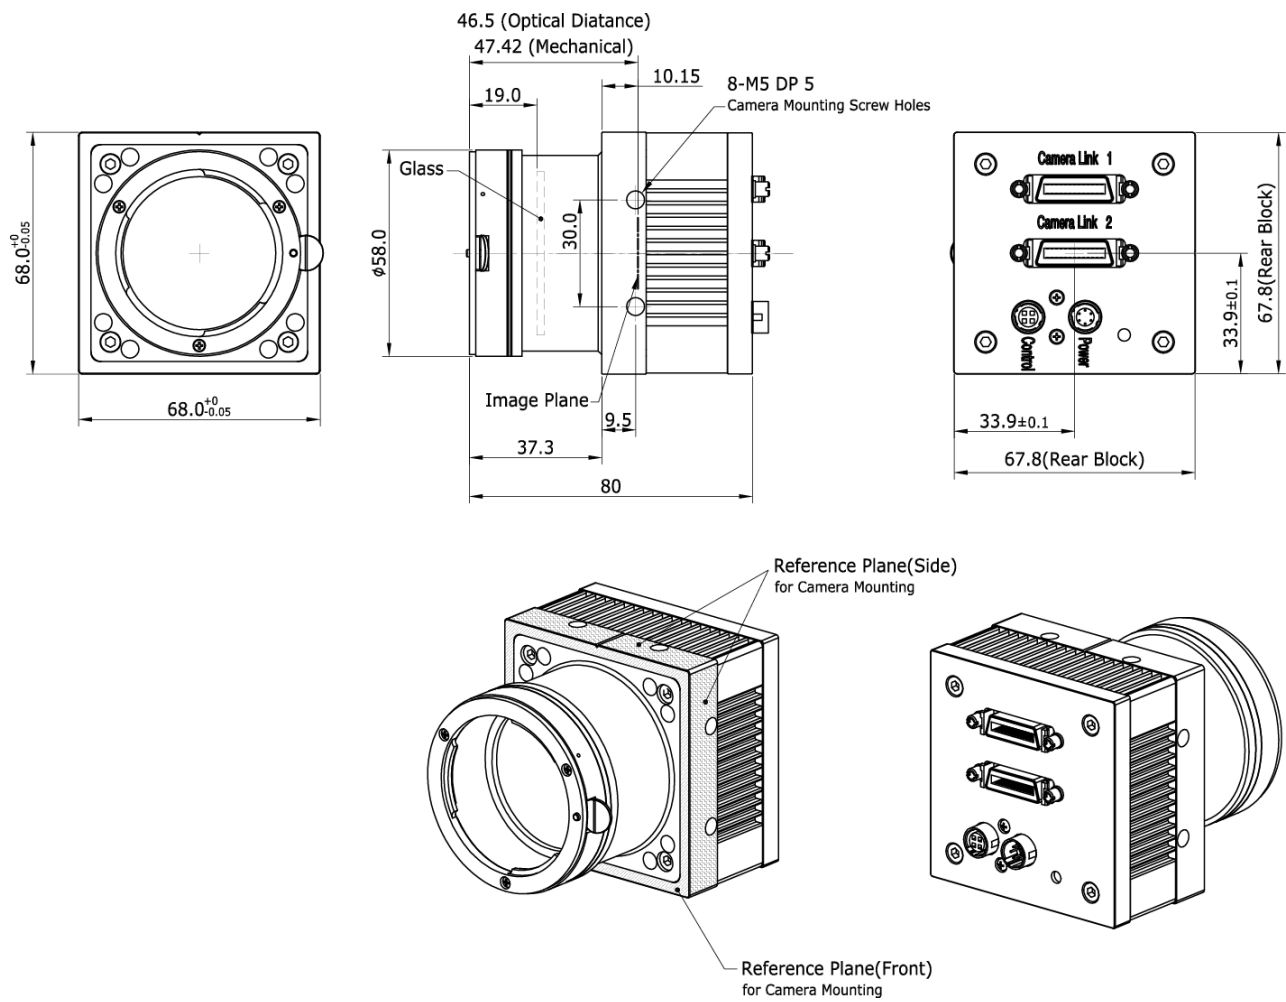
VC-12MC/25MC Camera Link F-mount Mechanical Dimension
